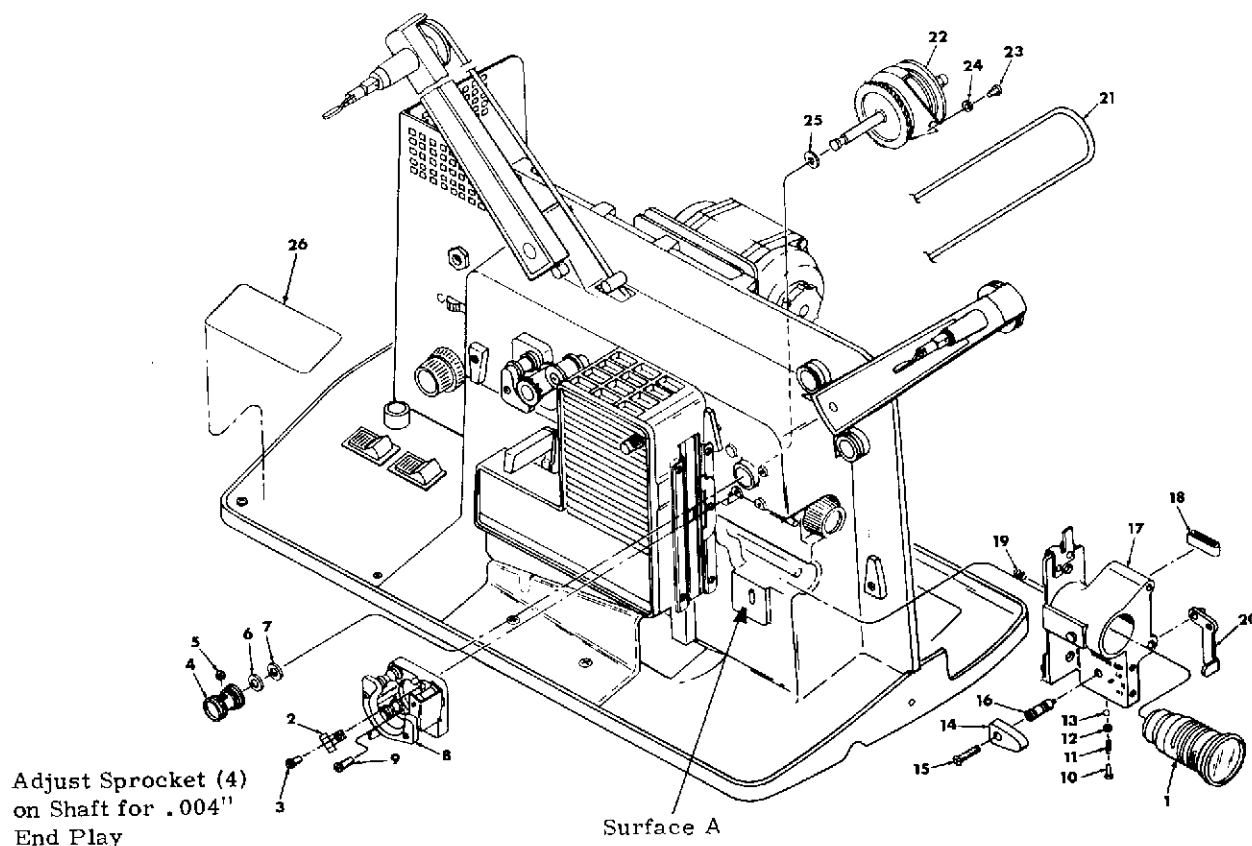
DISASSEMBLY AND REASSEMBLY FEED AND REWIND CLUTCH
